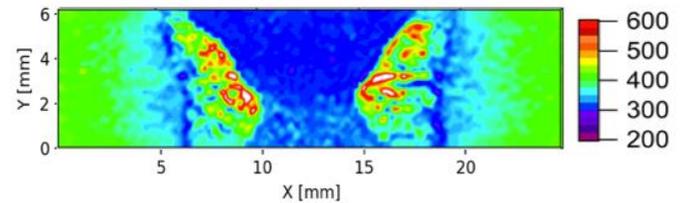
Flash® 600 single groove hardness mapping after being welded at room temp w/ ER120S-1 weld wire
